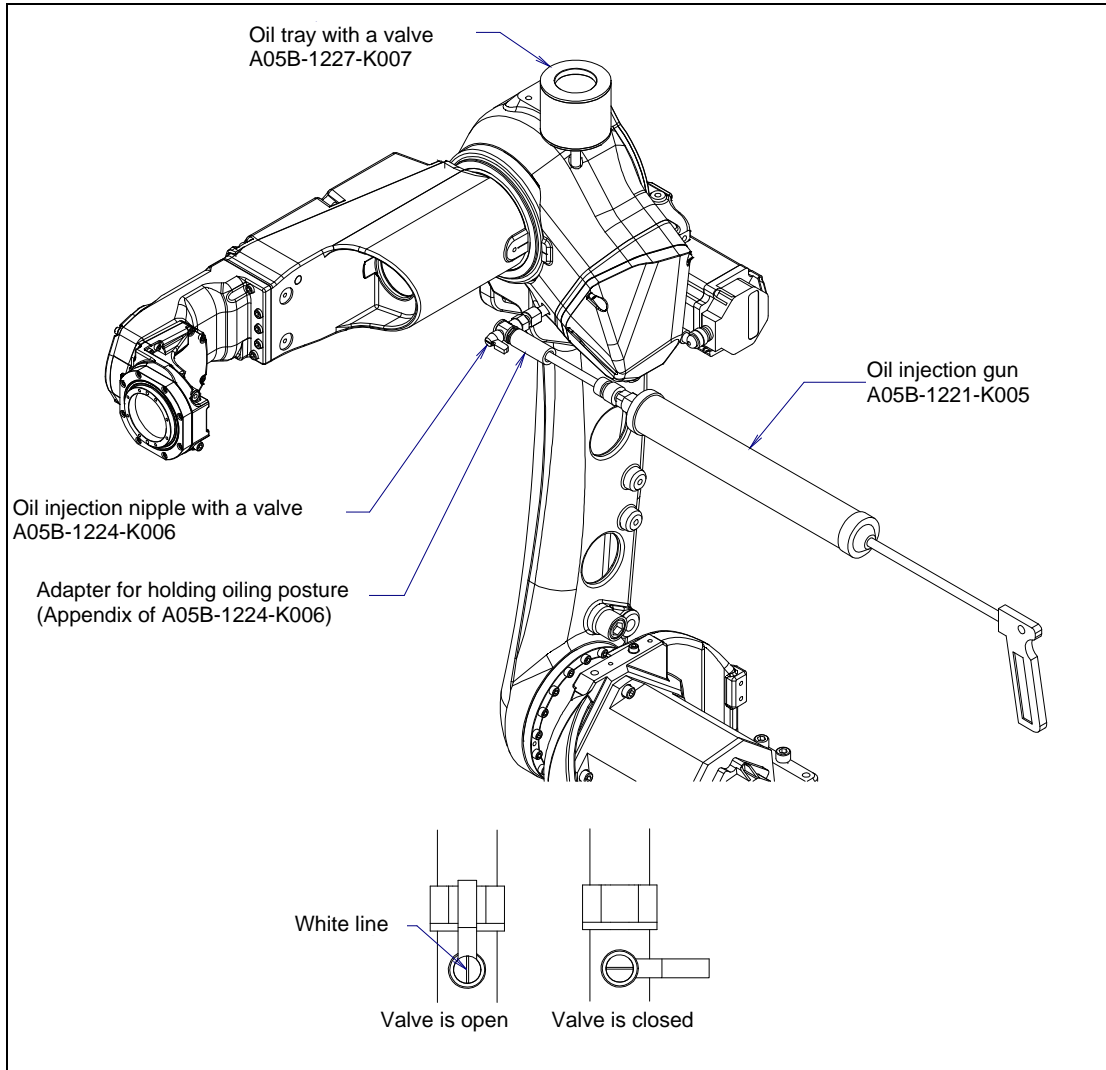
(b) Oil injection by oil gun (oiling of J4-axis gearbox)
